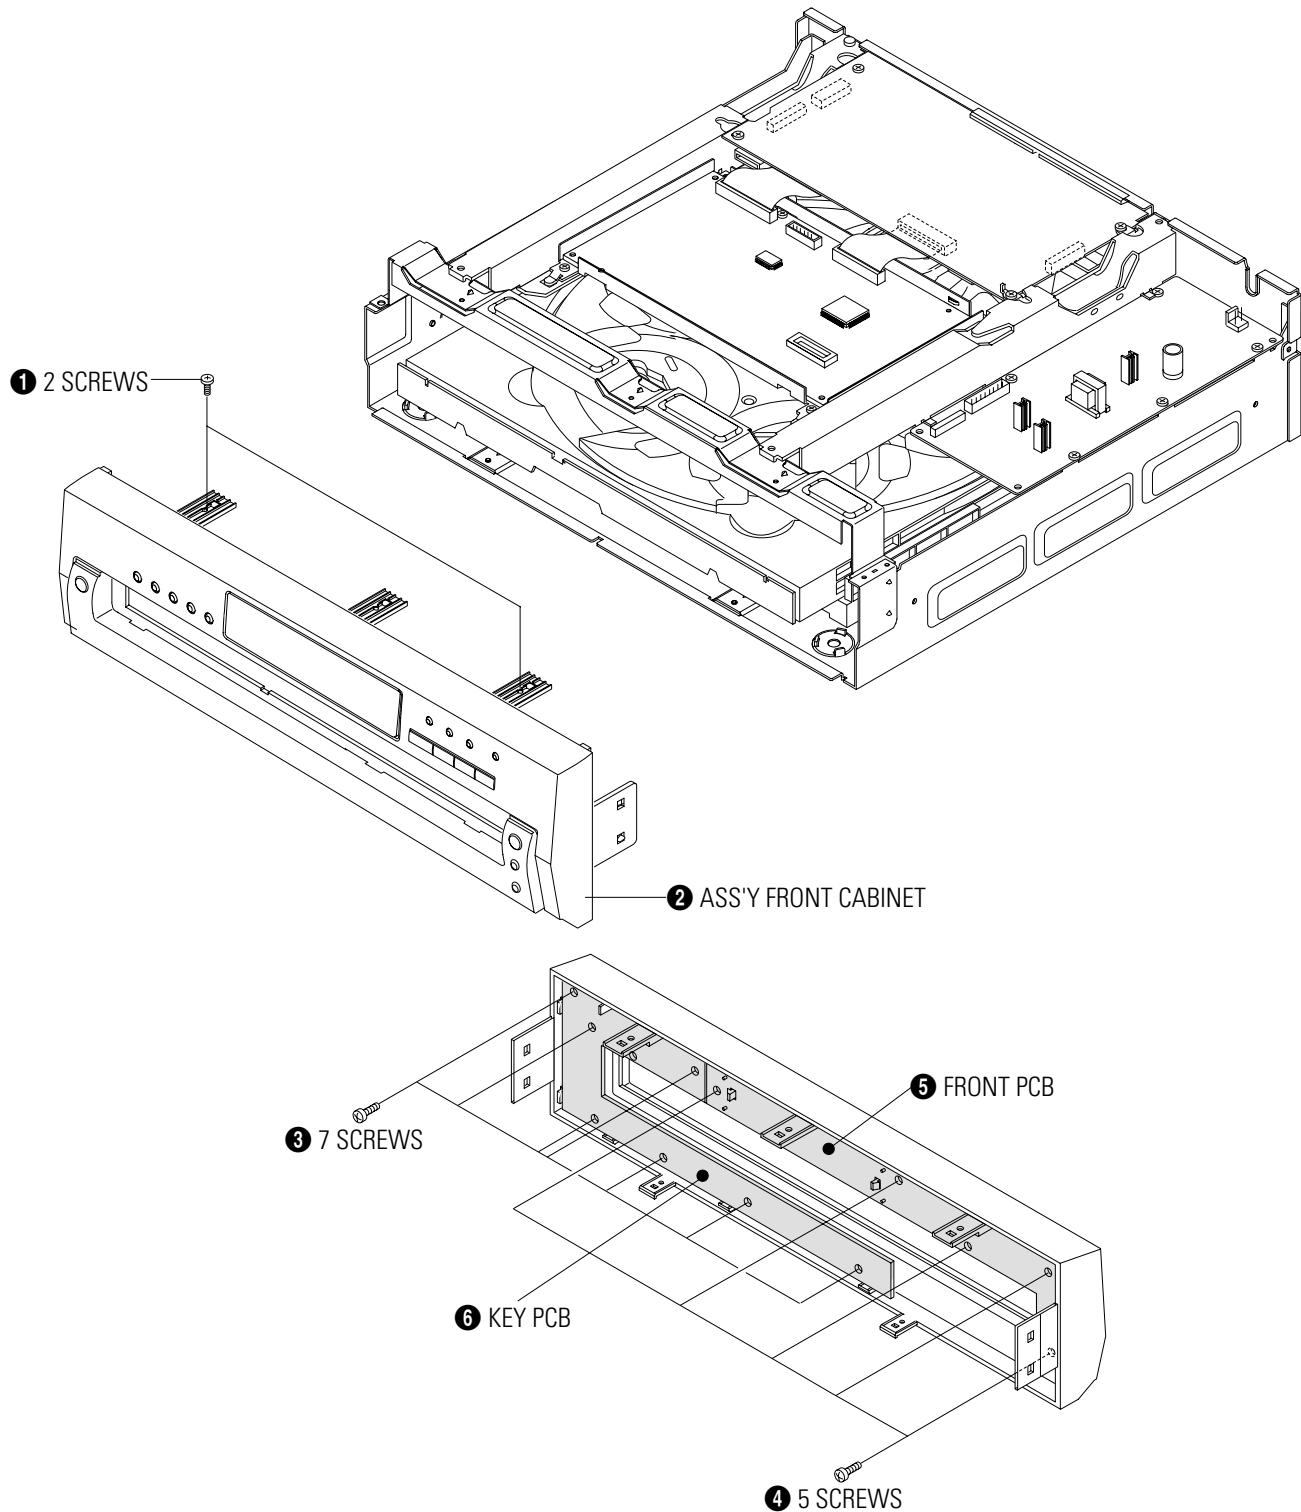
Ass'y Front Cabinet, Front/Key PCB Removal
